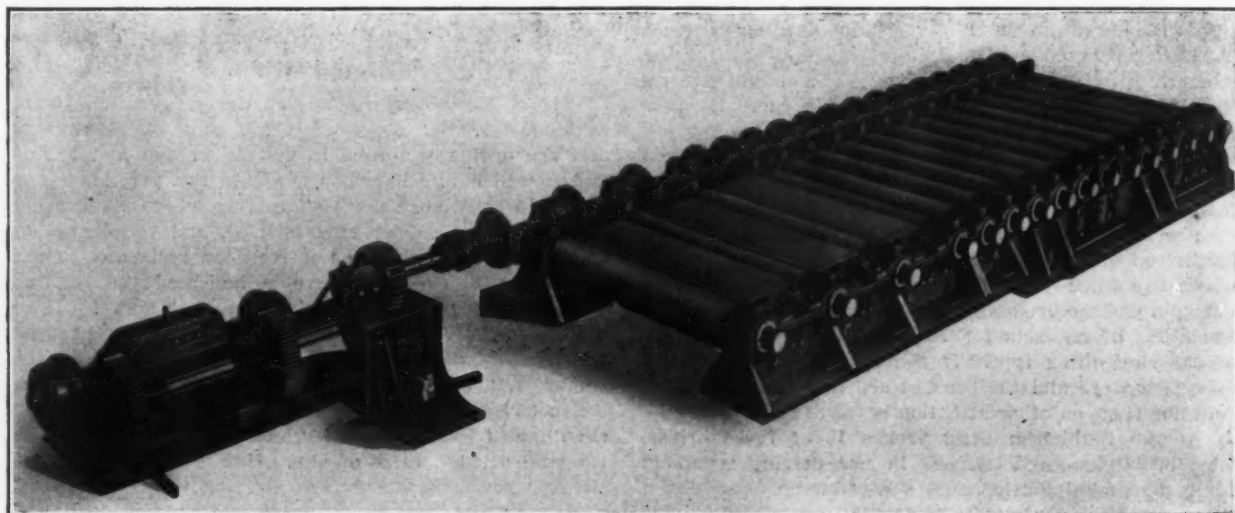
Blooming Mill Tables with a 75-Hp. Induction Clutch Drive Such as that Shown in Fig. 4.
